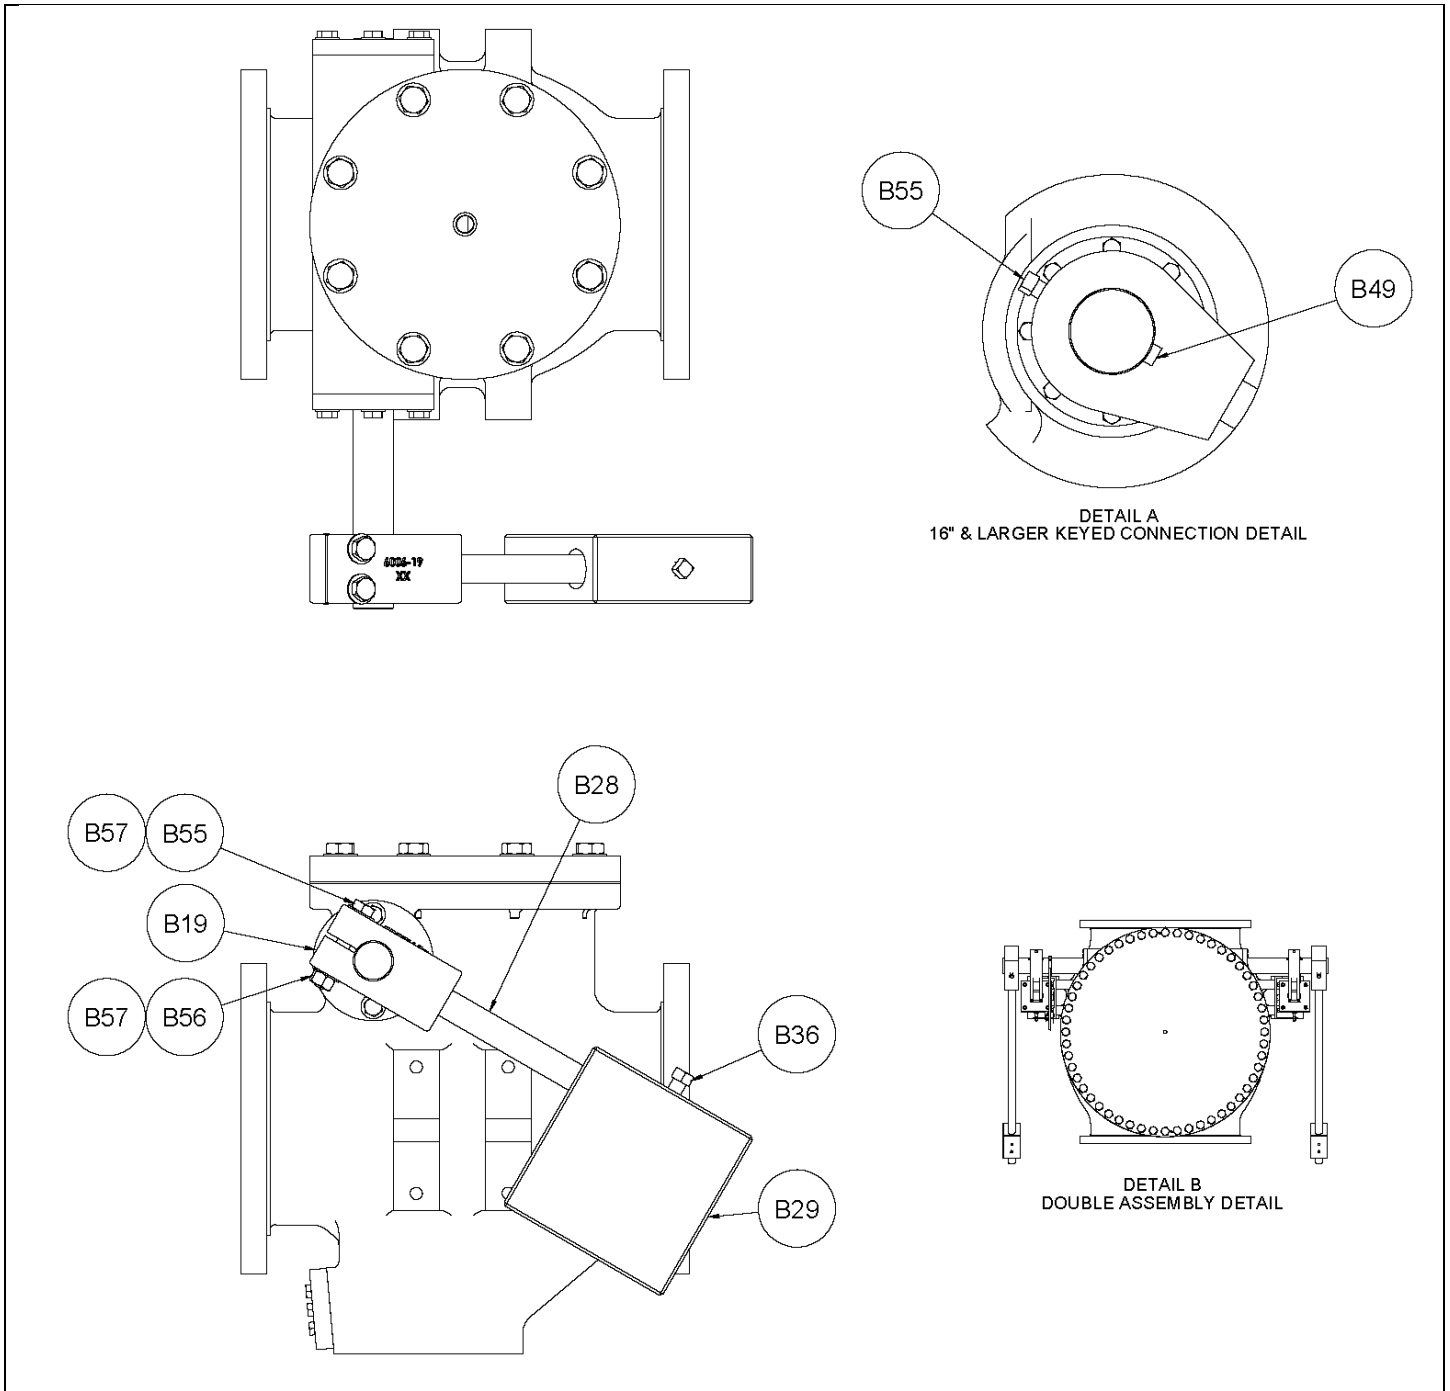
CVS-6000/6000A-LW and -CLW Swing Check Valve with Lever and Weight
